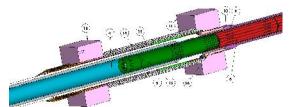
Schematic representation of the shield plug mounting inside of end fitting
